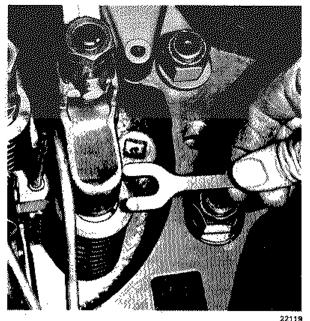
Checking Lash Adjuster To Valve Clearance
